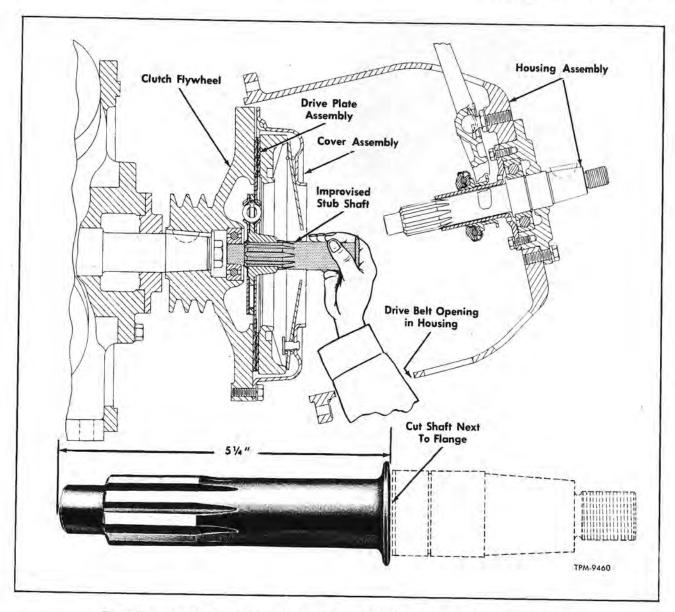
Installing Clutch Drive Plate and Cover Using Alignment Tool (Compressor in Coach)
